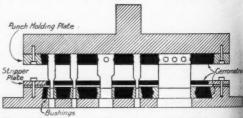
This drawing illustrates an inexpensive method of making a piercing die, including the stripper plate. The essential parts are the punch holder, die shoe and stripper plate with large apertures, punches with bushings to fit, and a template of the perforated blank for use in locating the punches and bushings.
